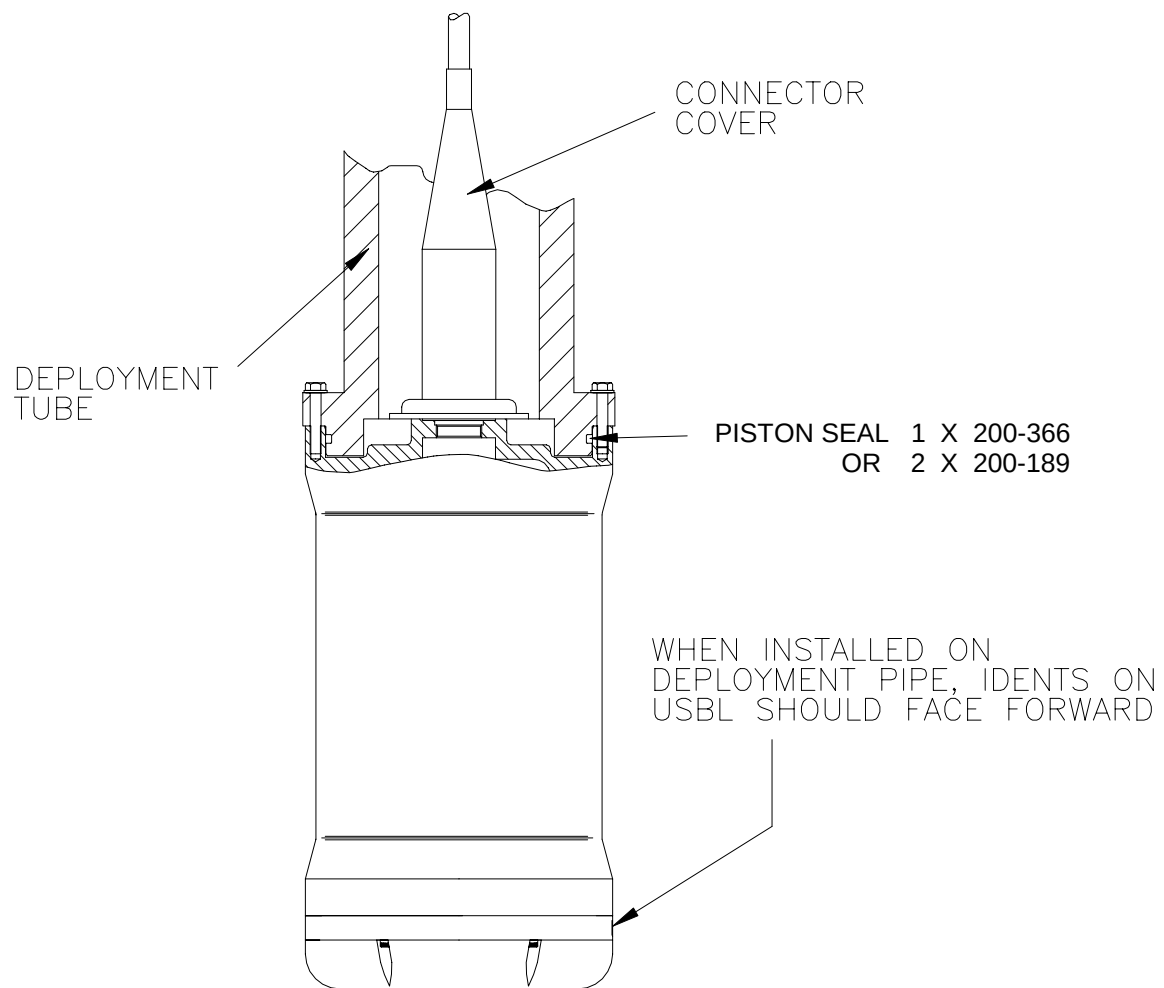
TRANSCEIVER FITTING TO POLE WITH A FACE SEALALTERNATIVE ISOLATION FLANGE 7769-117 (SECTIONAL VIEW)
